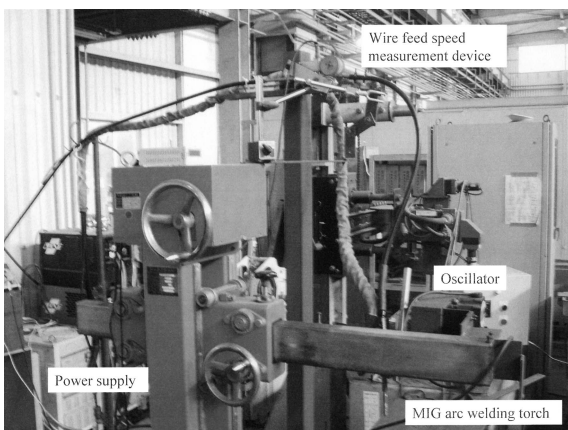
Experimental apparatus of MIG arc welding with high speed oscillation method
